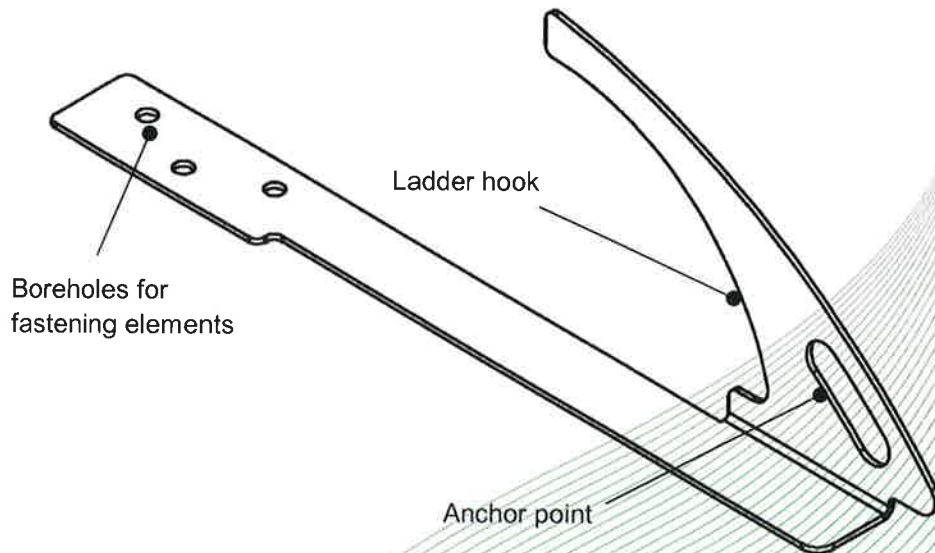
Safety roof hook, type: DHG (galvanized/stainless steel)
